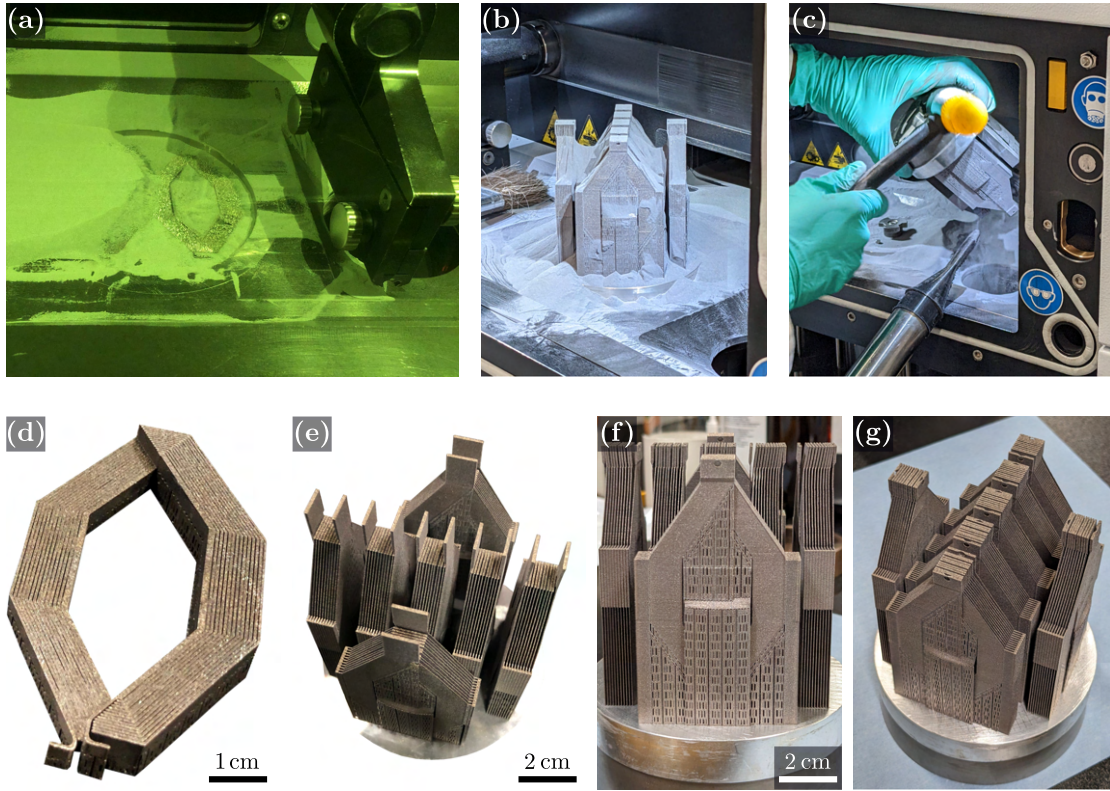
Printed coils: (a) *in-plane* types inside the printer; (b) *out-of-plane* types outside the powder bed; (c) removal of excess powder stuck between the pieces; resulting pieces with supports after powder removal for the (d) *in-plane* type, (e) *out-of-plane* types, and (f-g) *out-of-plane* with integrated heat sinks types.
